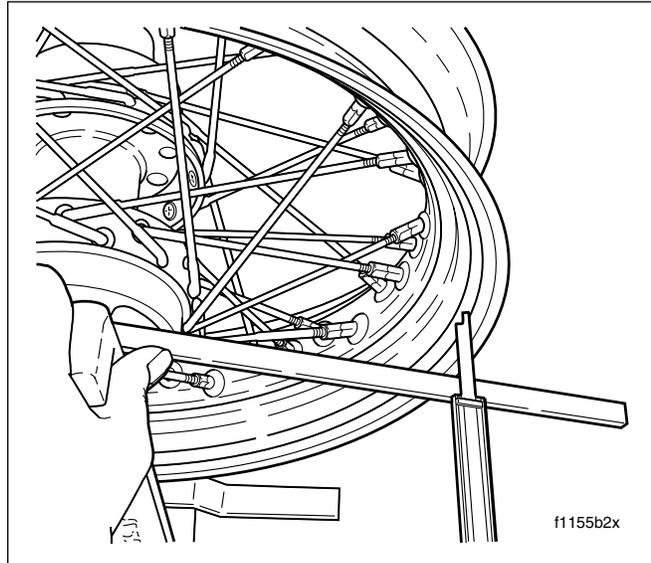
Checking Steel Laced Hub Offset Dimension
